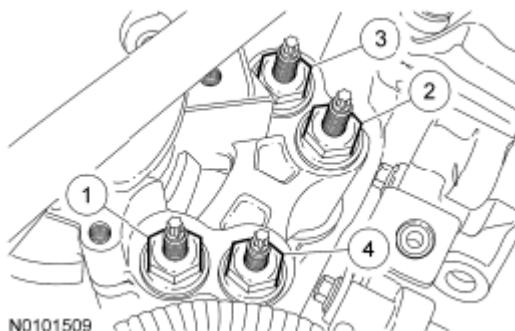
Identifying Engine Mount Nut Tightening Sequence
